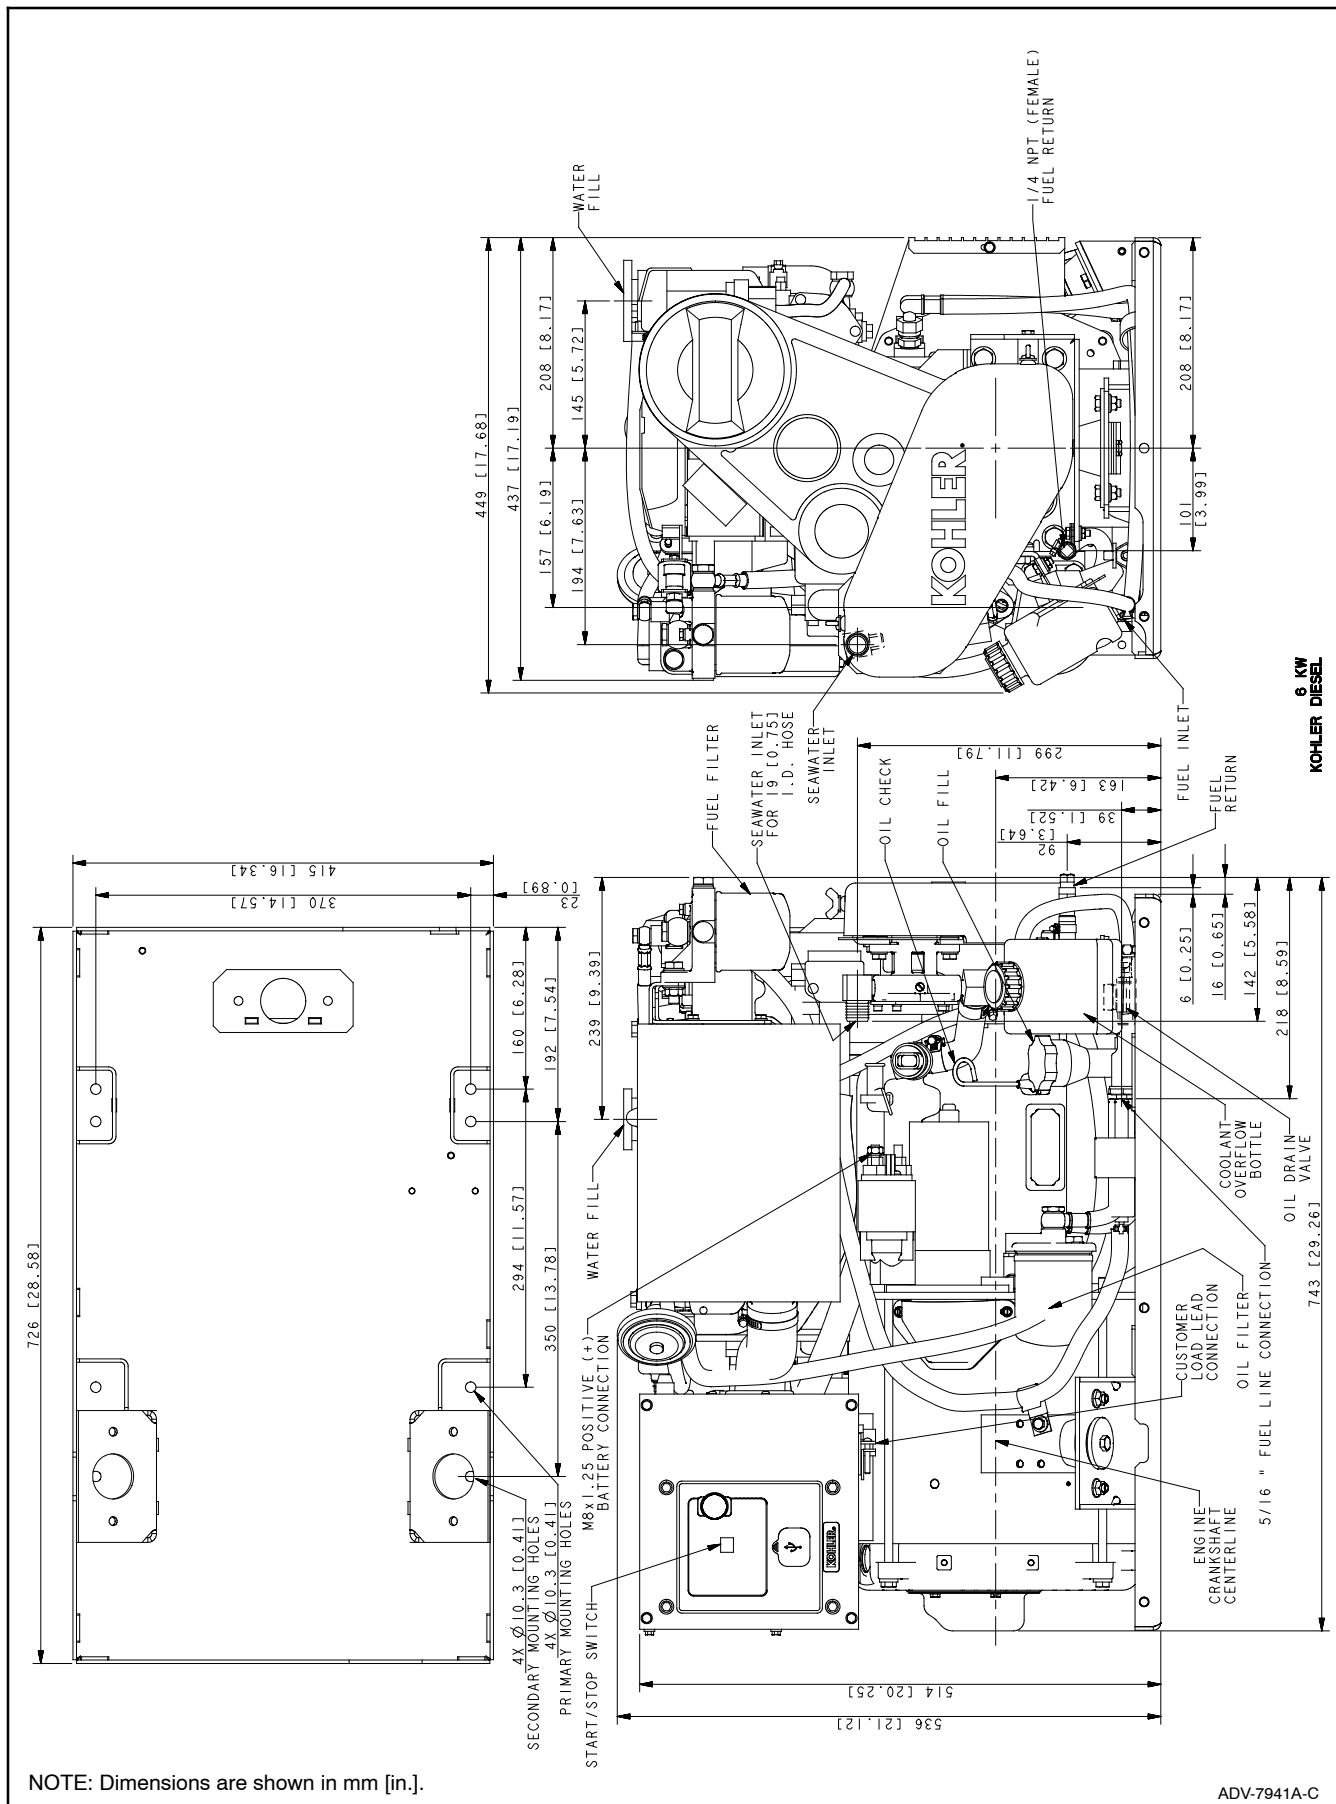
Dimension Drawing, 6EKOD and 5EFKOD (Sheet 1 of 2)
